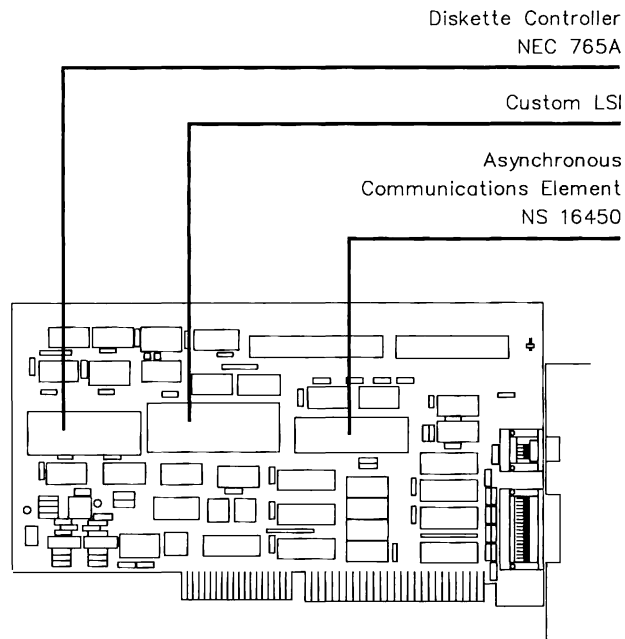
Multipurpose Fixed Disk Drive Controller Board Component Layout
